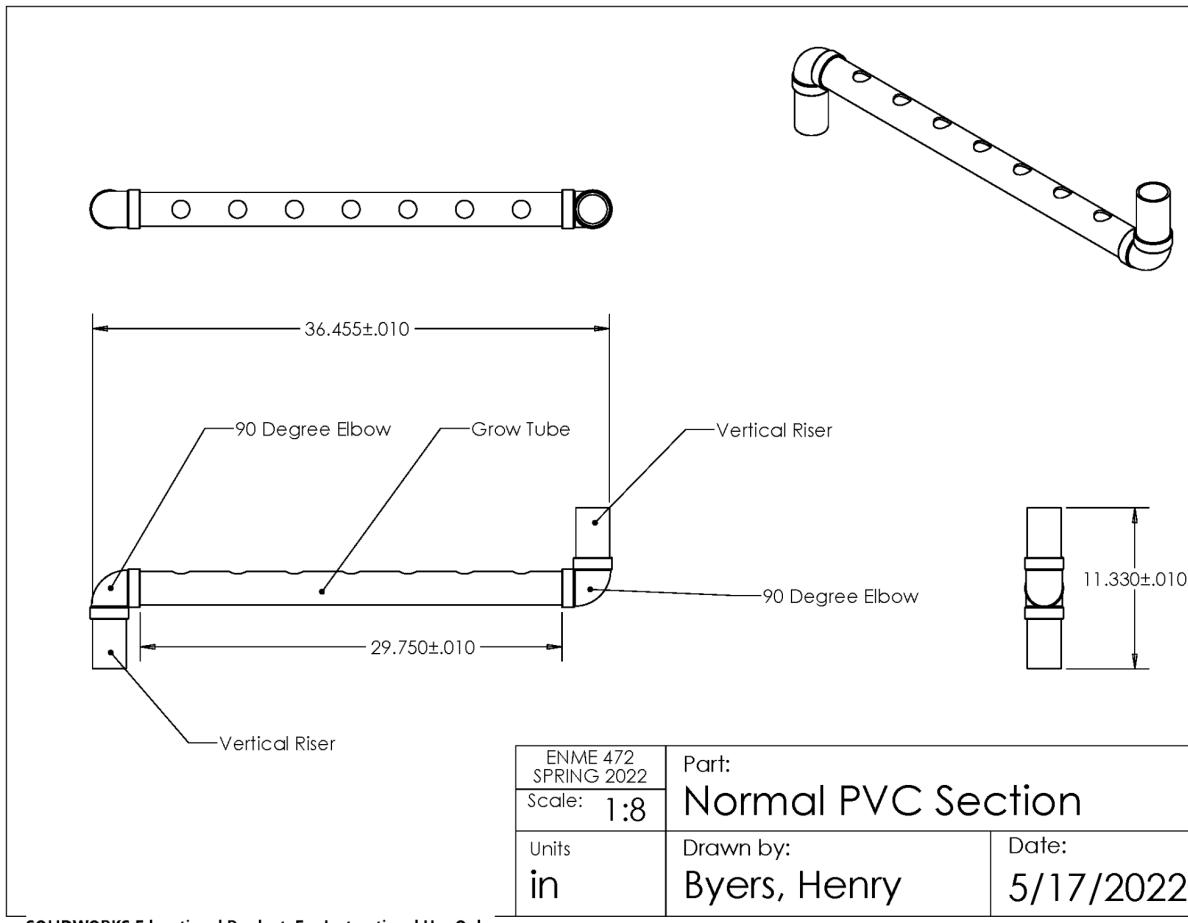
Engineering drawing for the normal (non-base layer) PVC tube subassembly
